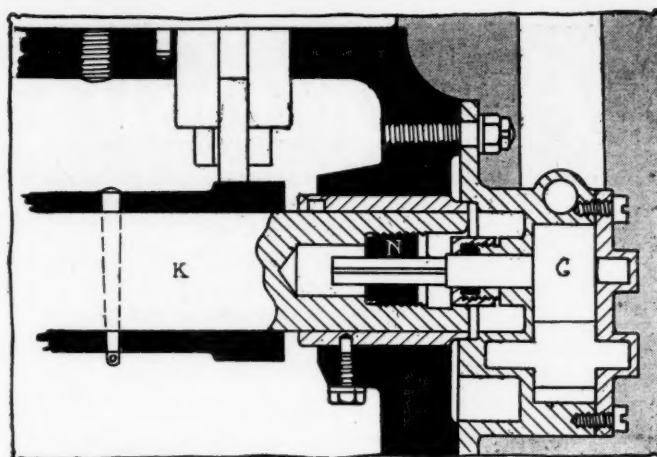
Oil pump gear G, of the oil pump attached to crankshaft. Note the compression release combined with the cam, keyed upon the crankshaft by a tapered pin
